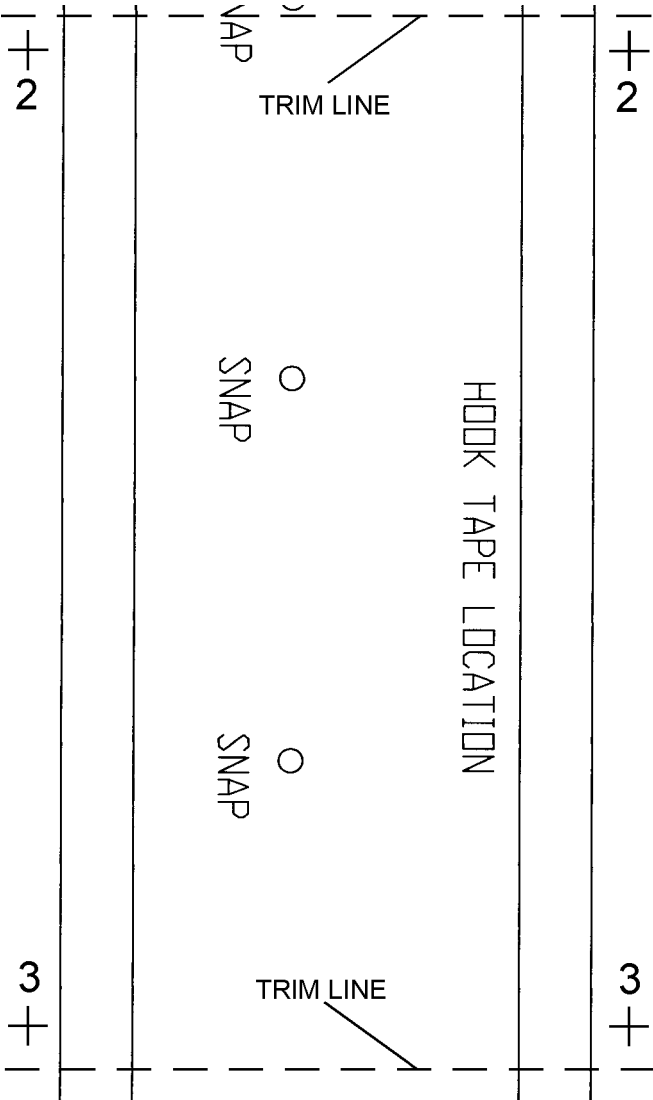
AF. HEED Pocket Support Panel Pattern (Sheet 3 of 4)
